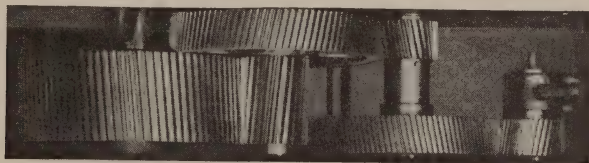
Planer drive, view looking down, platen (and rack) removed. All gears are helical, including the bull pinion, bull gear, and rack, and run in a bath of filtered oil. (Courtesy of The G. A. Gray Company.)
